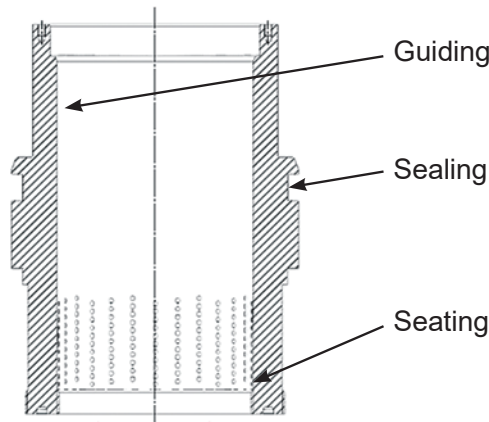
Cage Guiding, Sealing & Seating Surfaces
